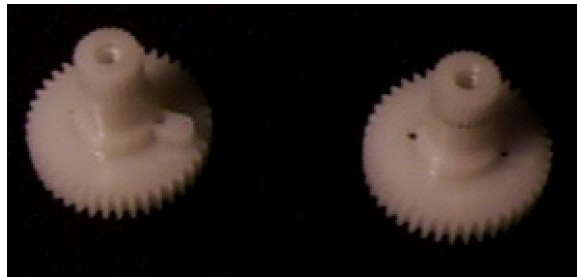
Large Gear with Rotation Stop Adjacent to Same Gear without Rotation Stop
